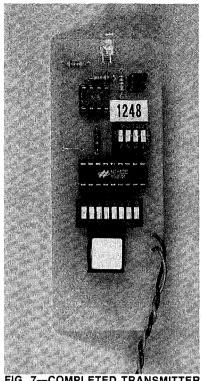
COMPLETED TRANSMITTER BOARD. This board allows unique coding that won't interfere with nearby remote-controlled equipment.
